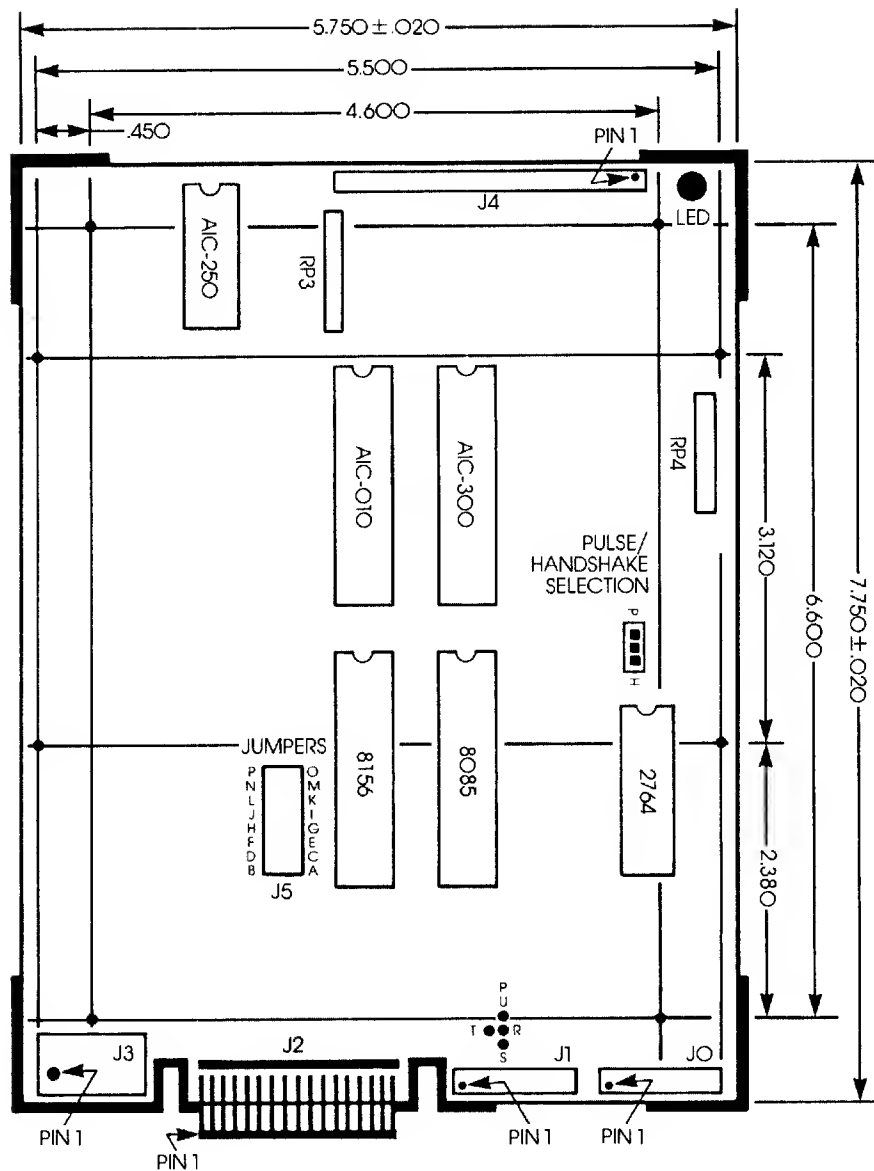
ACB-4000A BOARD LAYOUT
